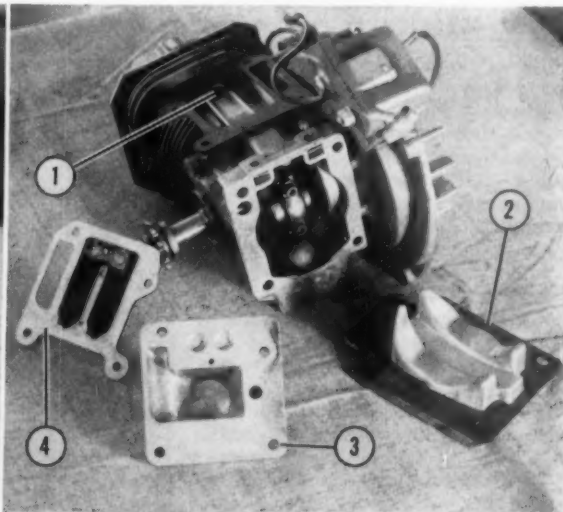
Engine intake system: 1—intake ports, 2—crankcase bottom and stuffer, 3—intake manifold assembly and 4—reed valve and plate assembly.
